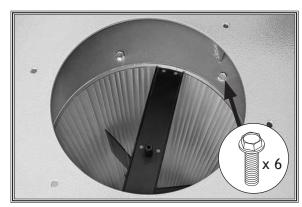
Remove flange bolts to remove canister filter assembly from impeller housing.
